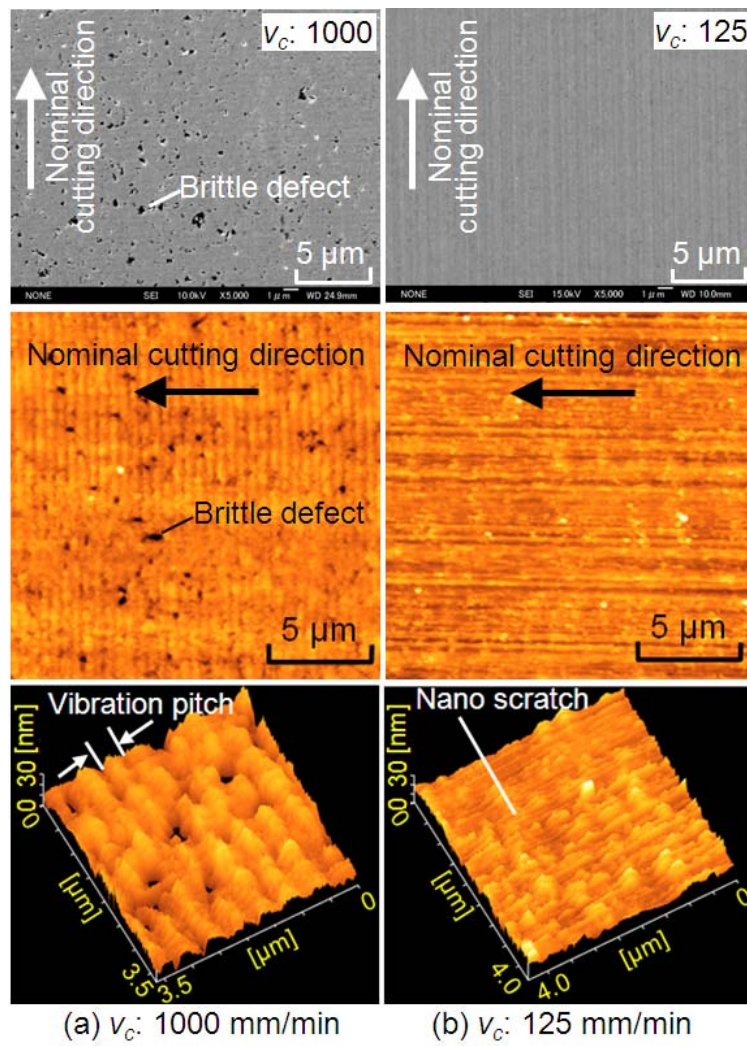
SEM and AFM images of machined surfaces in elliptical vibration cutting (nominal cutting distance: 0.4 m,  $v_c$ : nominal cutting speed mm/min)
